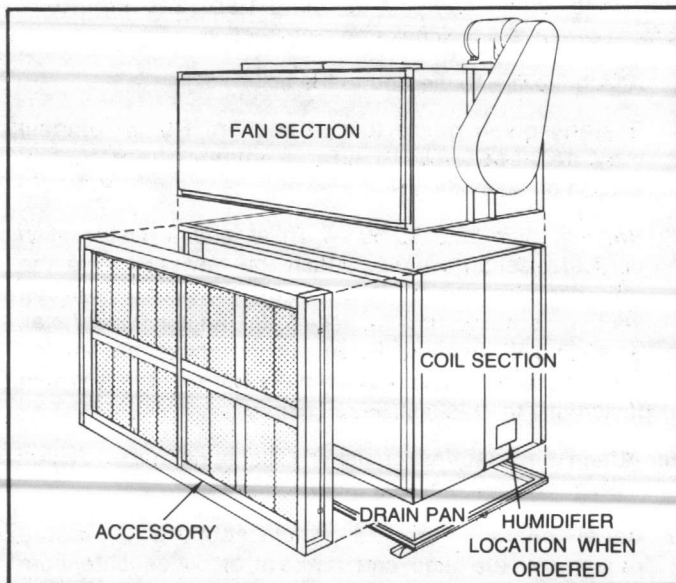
Exploded View of the Vertical Draw-Thru Unit Sizes 35 through 50
